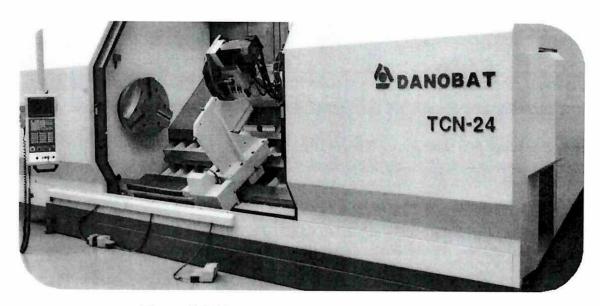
(b) (i): Horizontal CNC Lathe Machine
